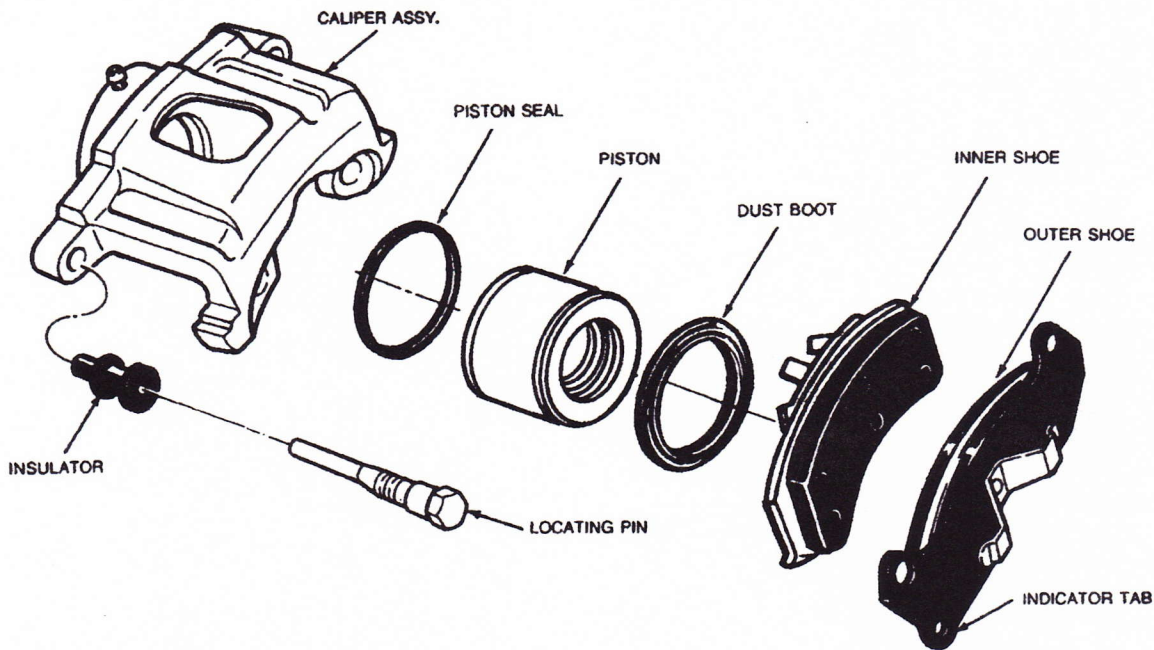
Parts of a typical sliding caliper. Courtesy of Ford Motor Company
